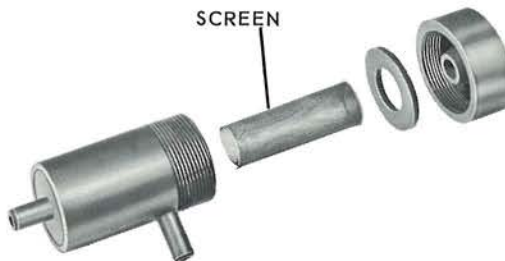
A DEVELOPER STRAINER ASSEMBLY
